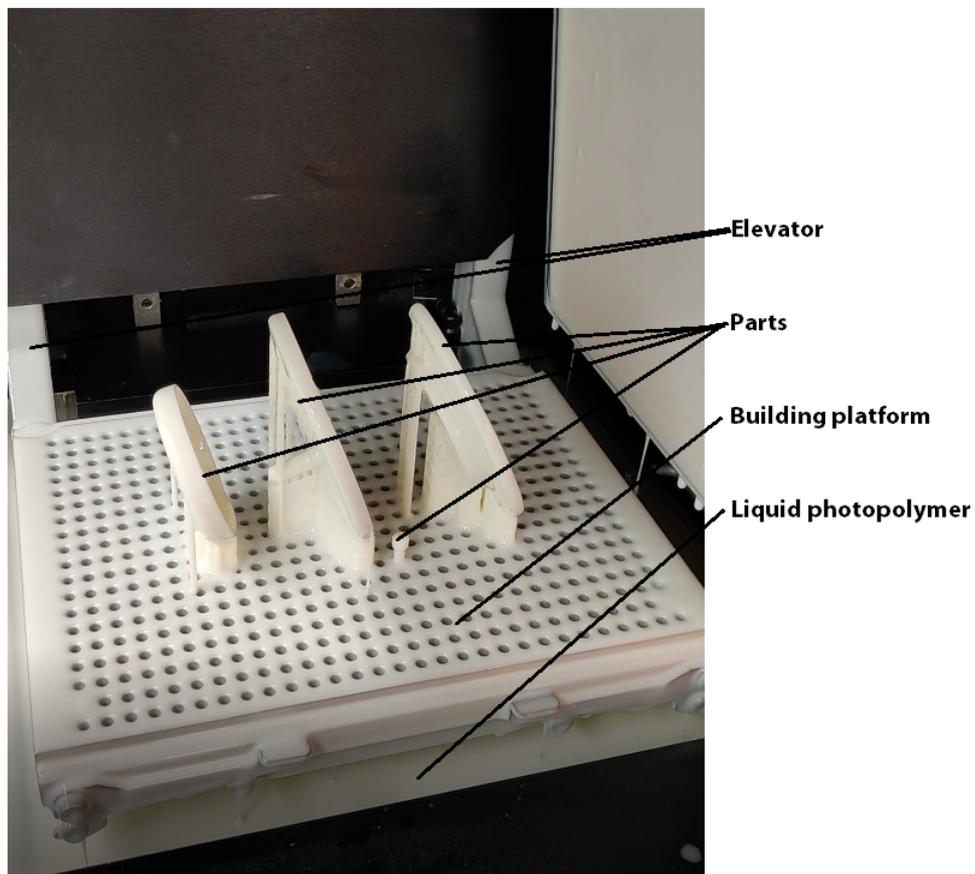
DLP (similar to SLA) 3D printing machine, with fresh printed parts. Source: CETEM.
